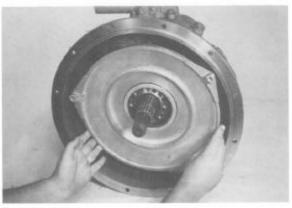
When baffle is loose remove baffle bolts. Remove oil baffle from housing.
